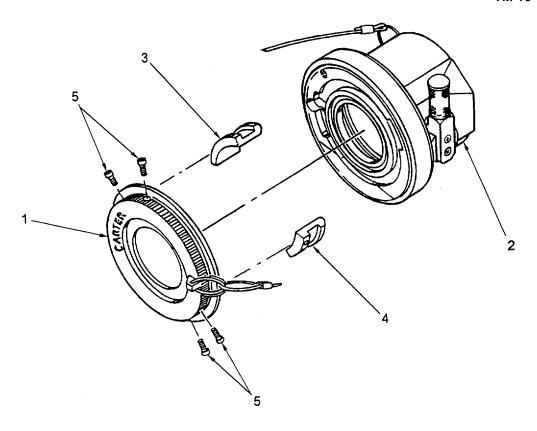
Three-Inch Unisex Coupling Dust Cap Lug Replacement
